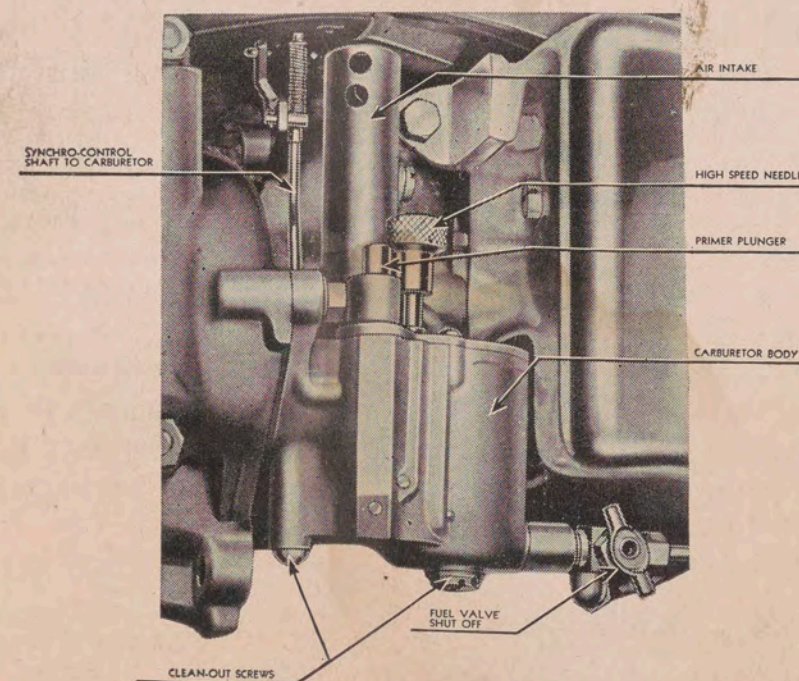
Carburetor Wedge Models LS, DS, LT & DT.
